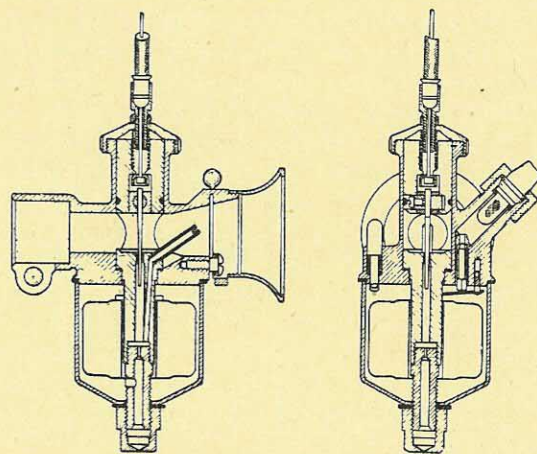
SECTIONAL ARRANGEMENTS OF MIDGET CARBURETTER.
